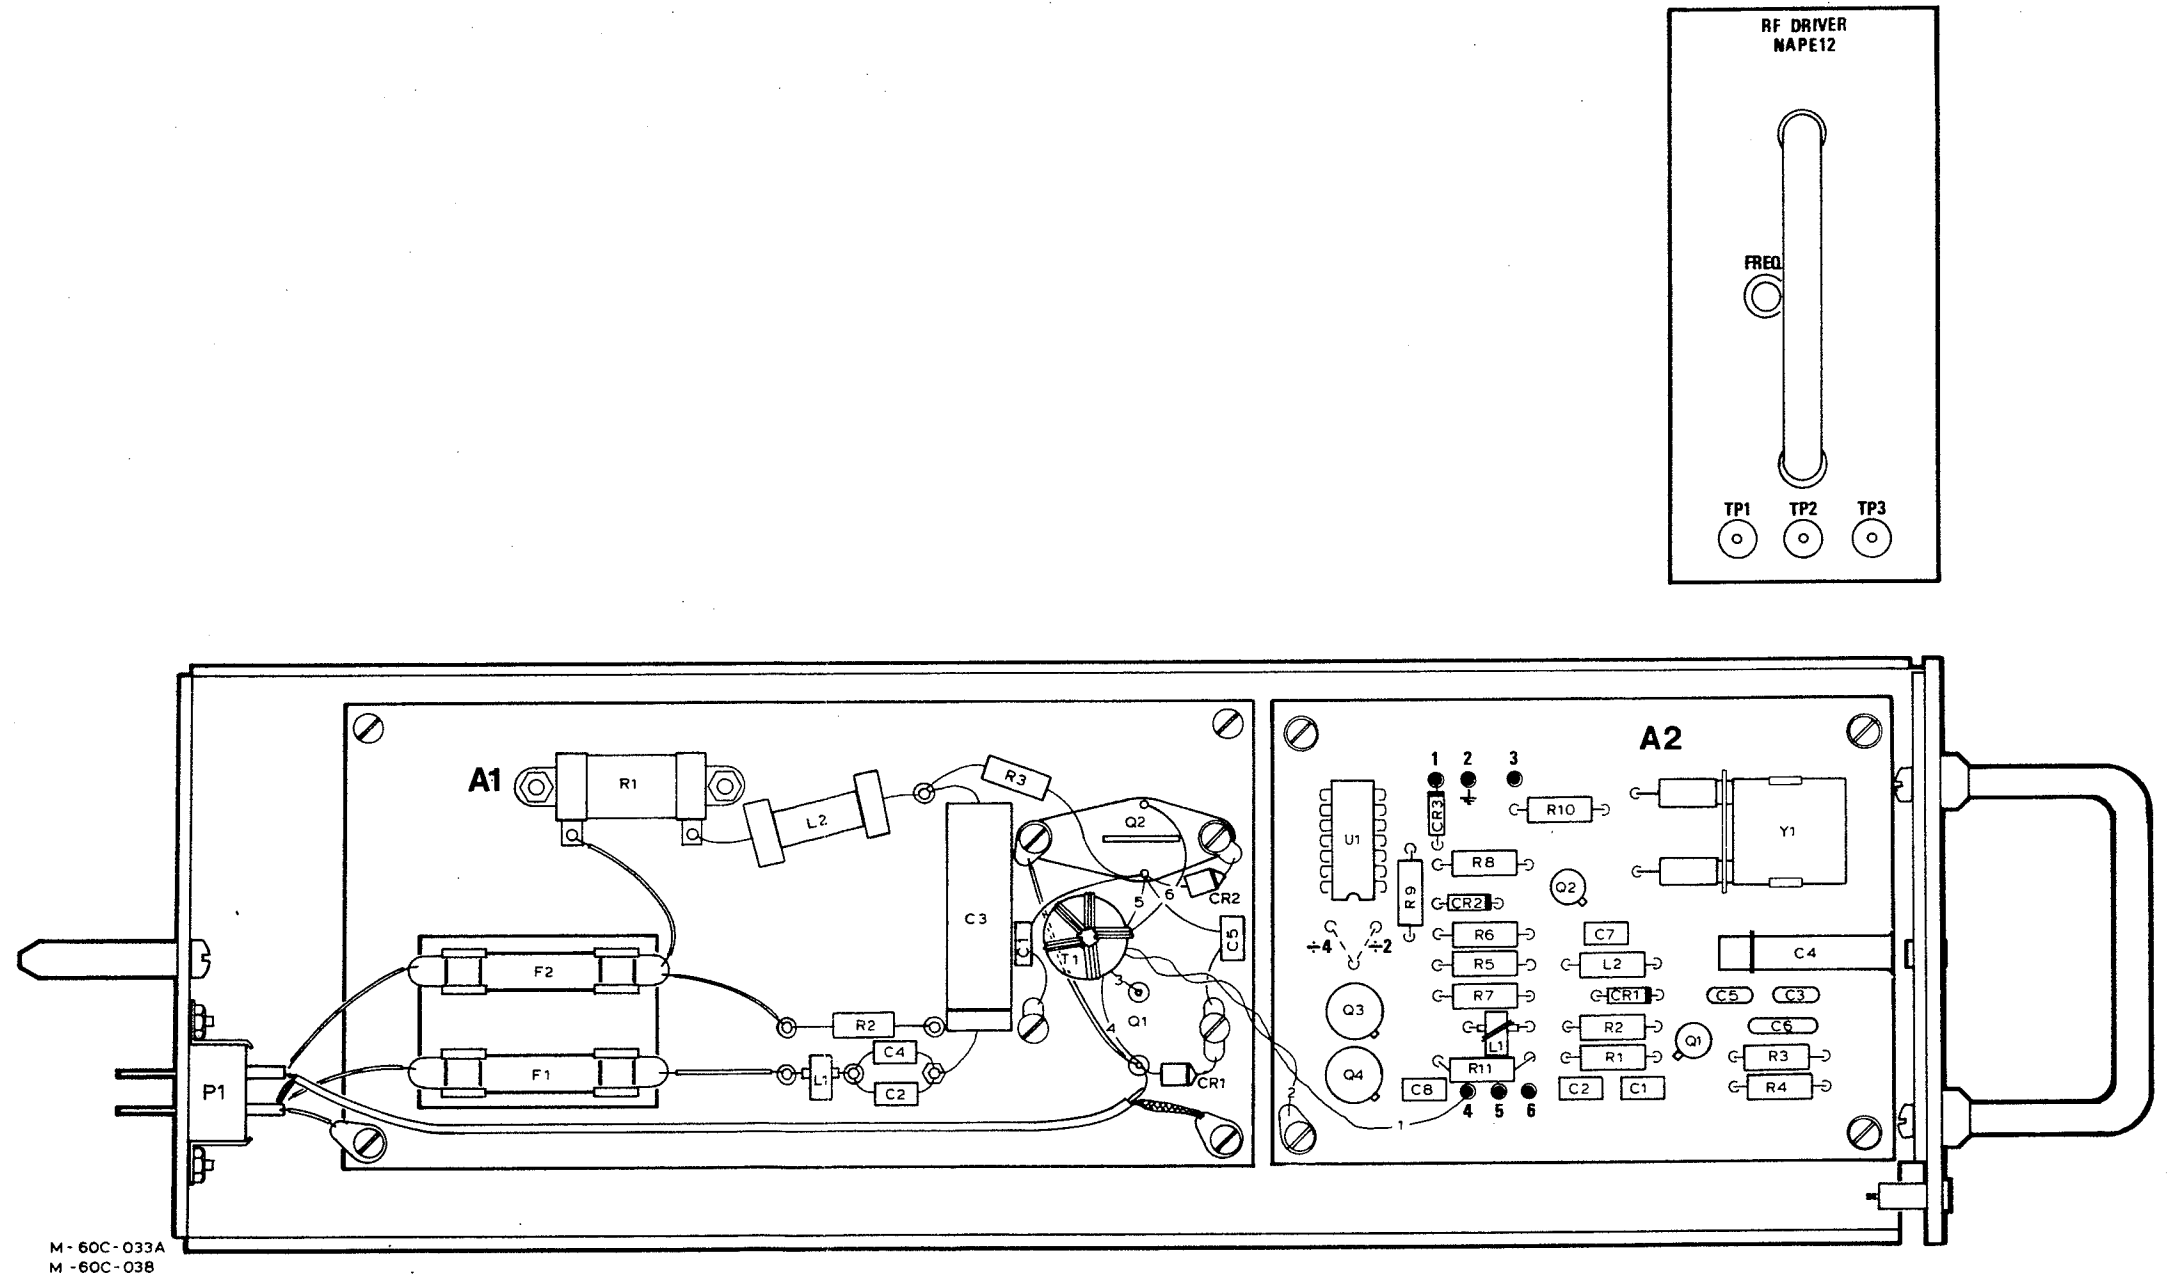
Assembly Detail - NAPE12 RF Driver Module
